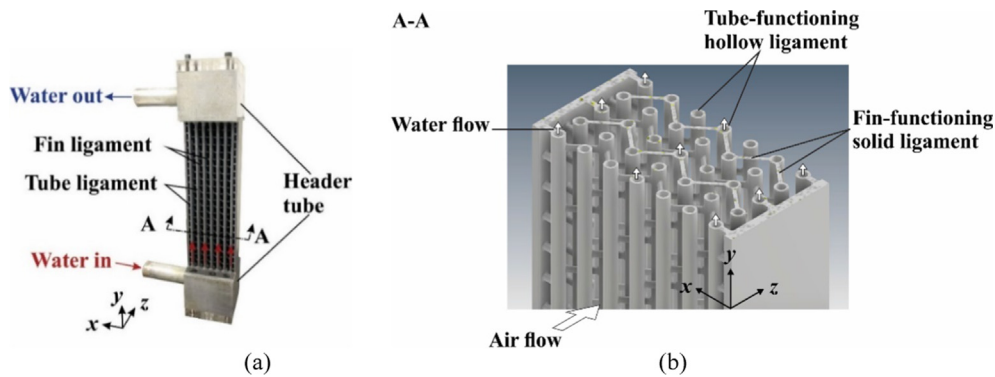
Lattice porous heater core: (a) Assembled core with header tubes, (b) Cut-away view in the x - z plane (A-A).
